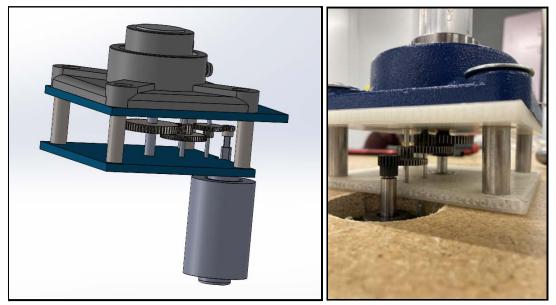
Gearbox assembly with mounted flange bearing, gears w/ gear shafts, 1.5" spacers, and the generator.
